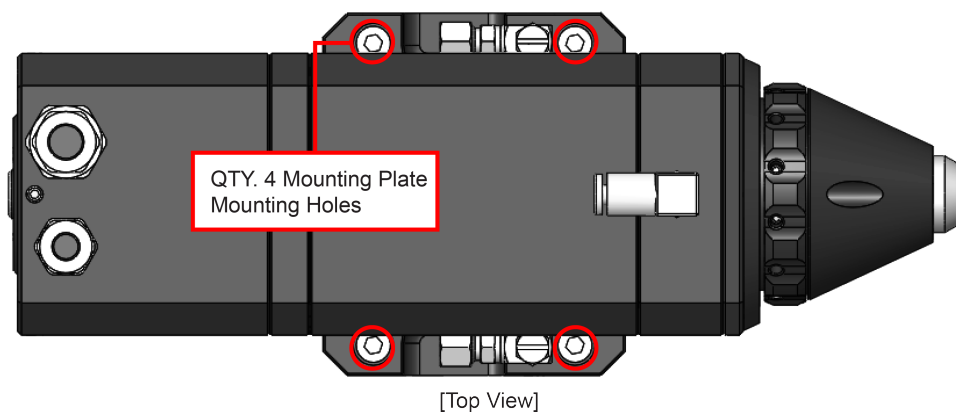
ASR1300 Stage Showing Mounting Plate (Top View)
